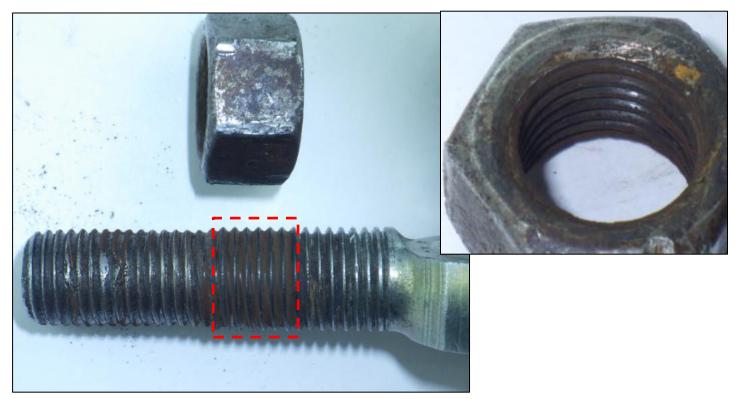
Nut removed showing rust on bolt and nut threads were they were seized together.
